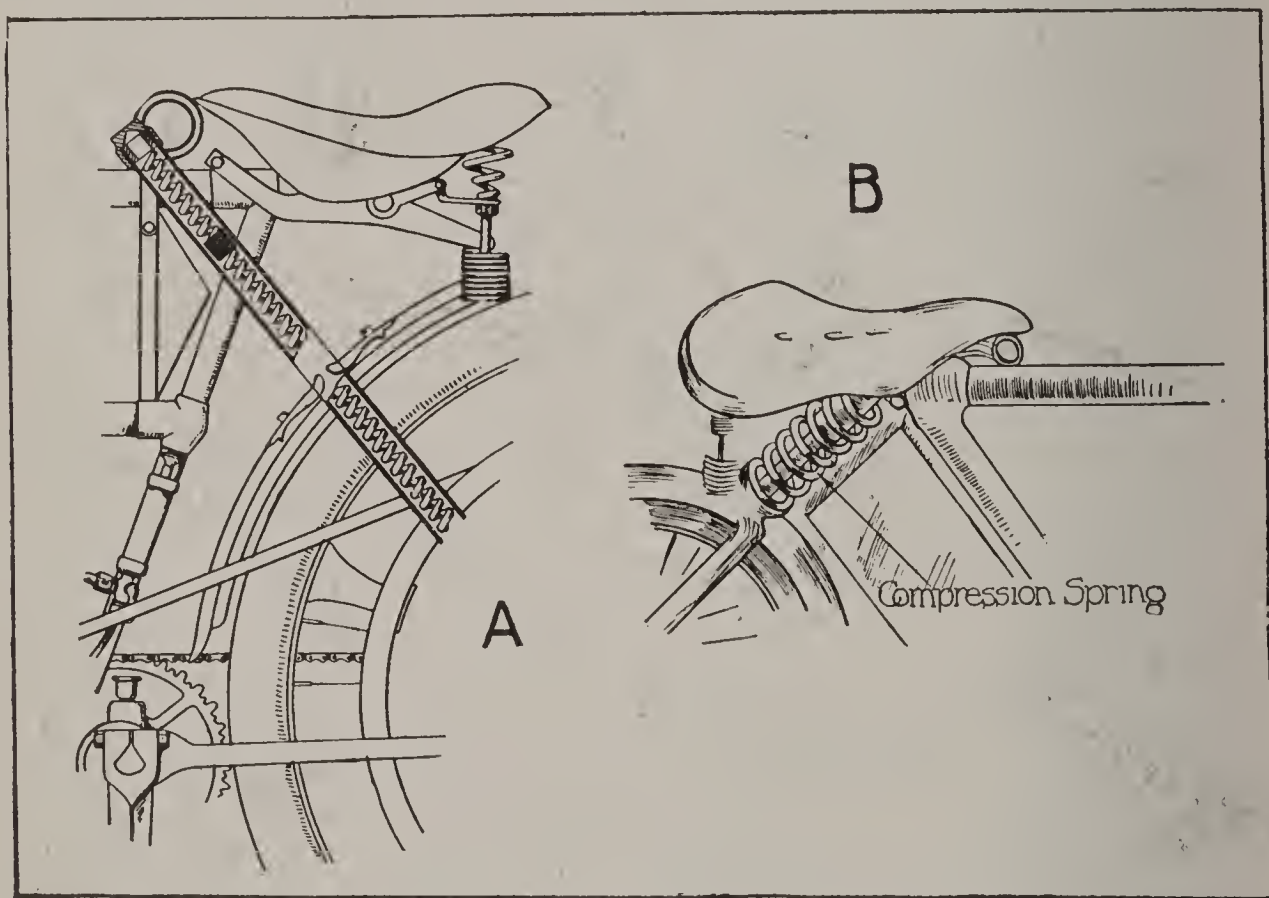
Two Methods of Incorporating Coil Springs in Spring Frames. A—Application in Merkel Rear Fork Stays. B—Compression Springs Used on N. S. U. Model.
